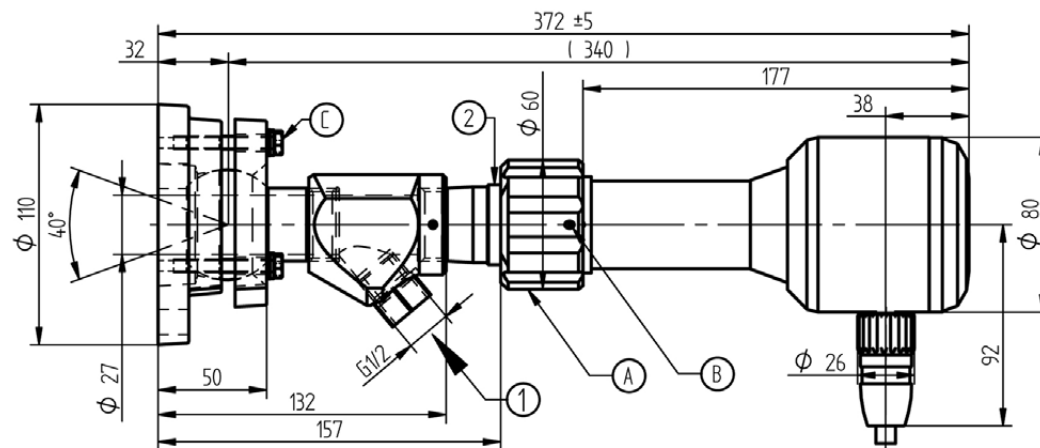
Dimensional drawing FV40-10 type 659S1300 with compact flame scanner F200K
